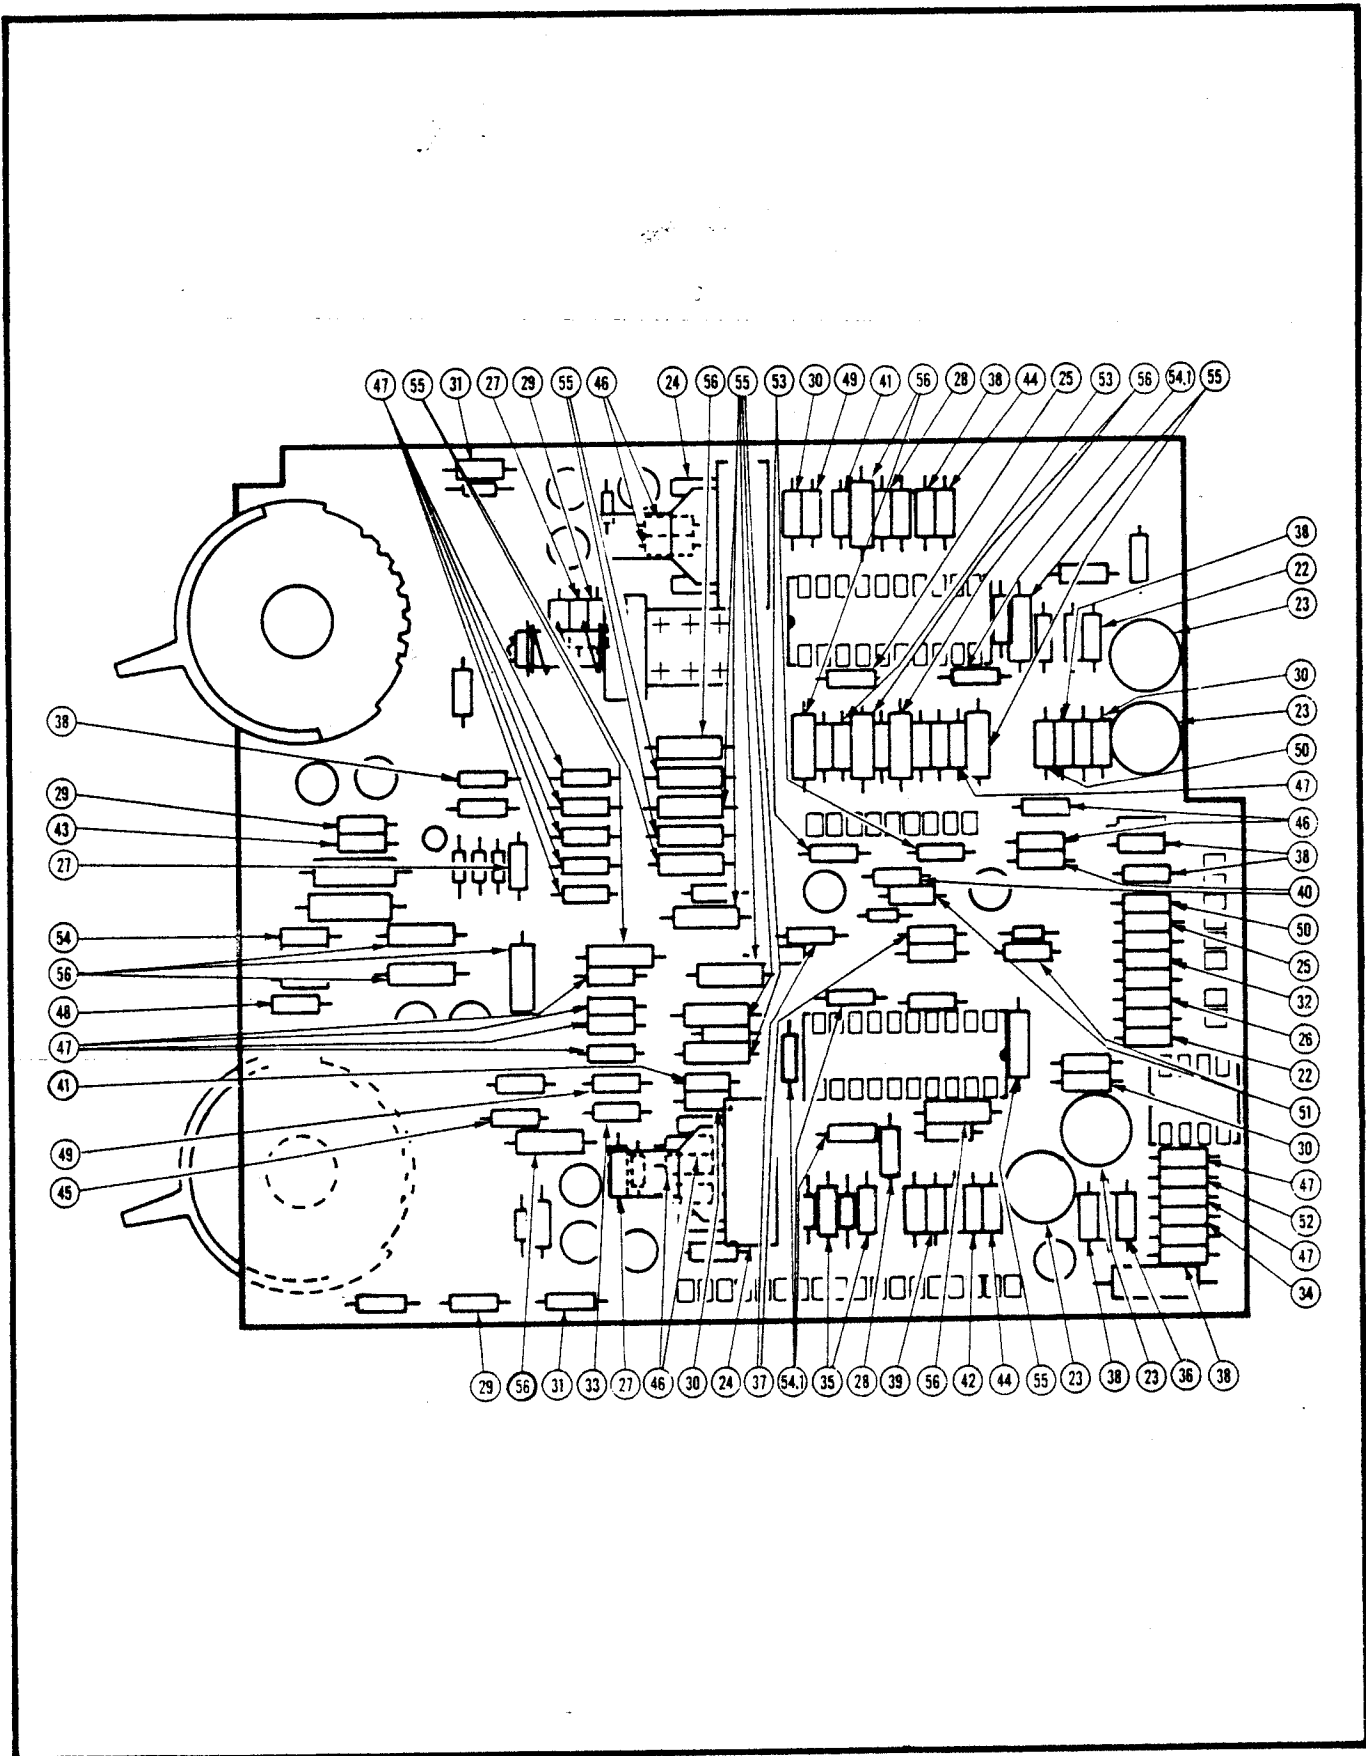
A7 Circuit Board Assembly, Trigger (sheet 2 of 3).
